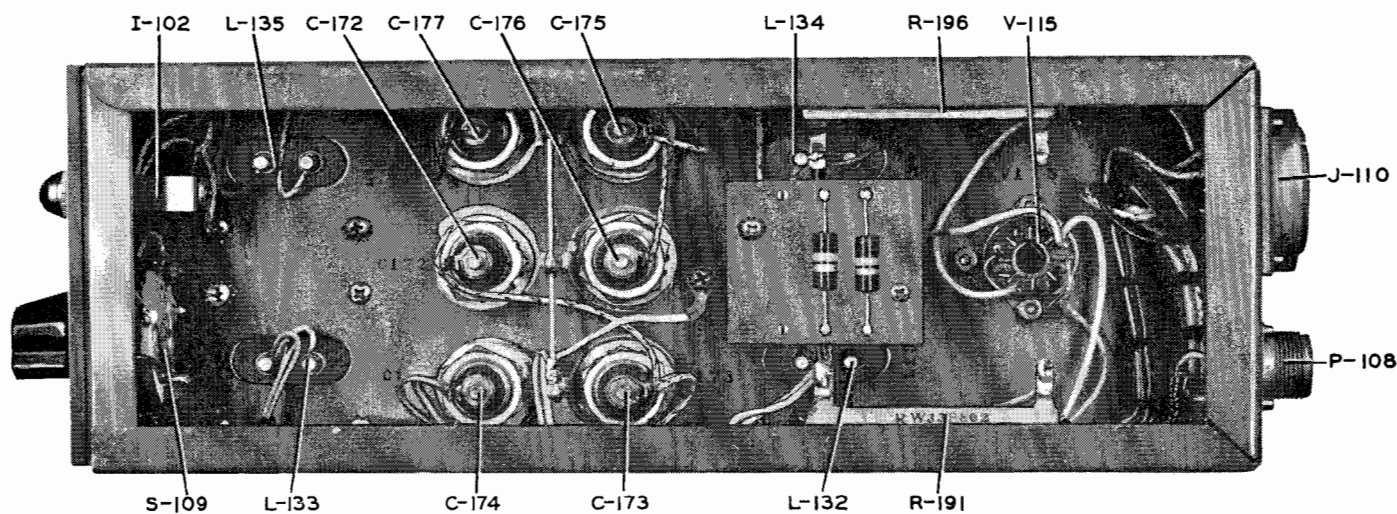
Keyer KY-30/GRT Power Supply Parts Arrangement, Right Side
